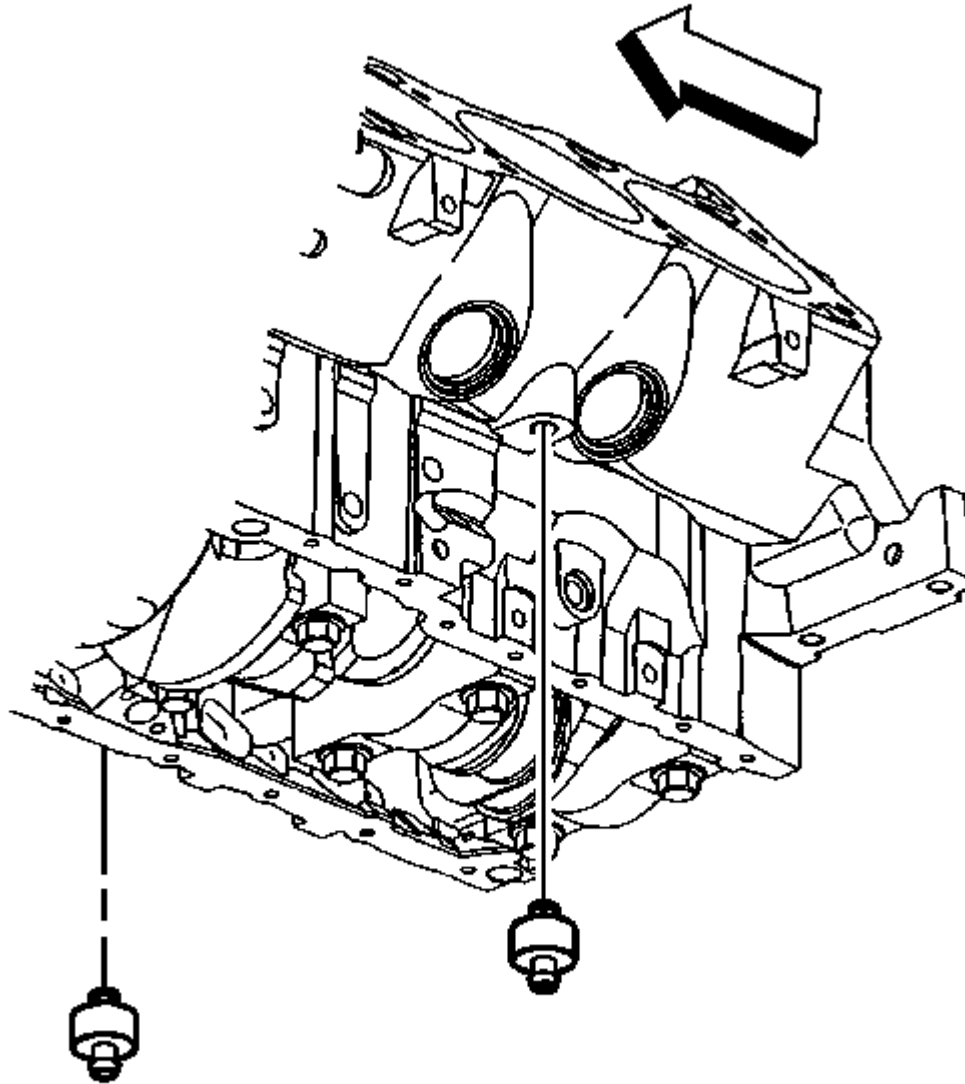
Removing Knock Sensor Heat Shield Bolts
